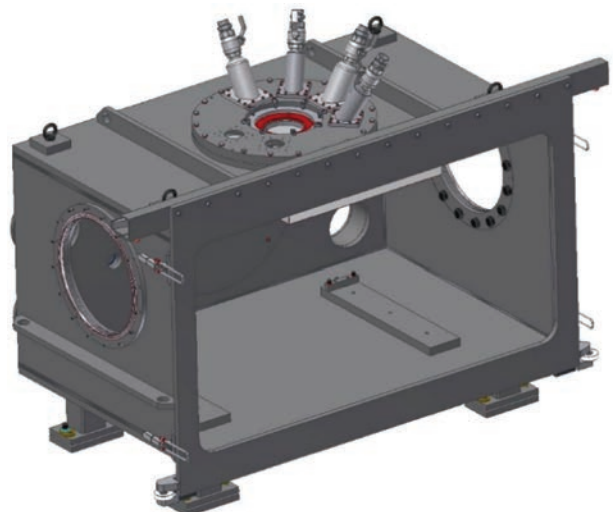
An example of design of welding chamber module for high-productive welding machine
